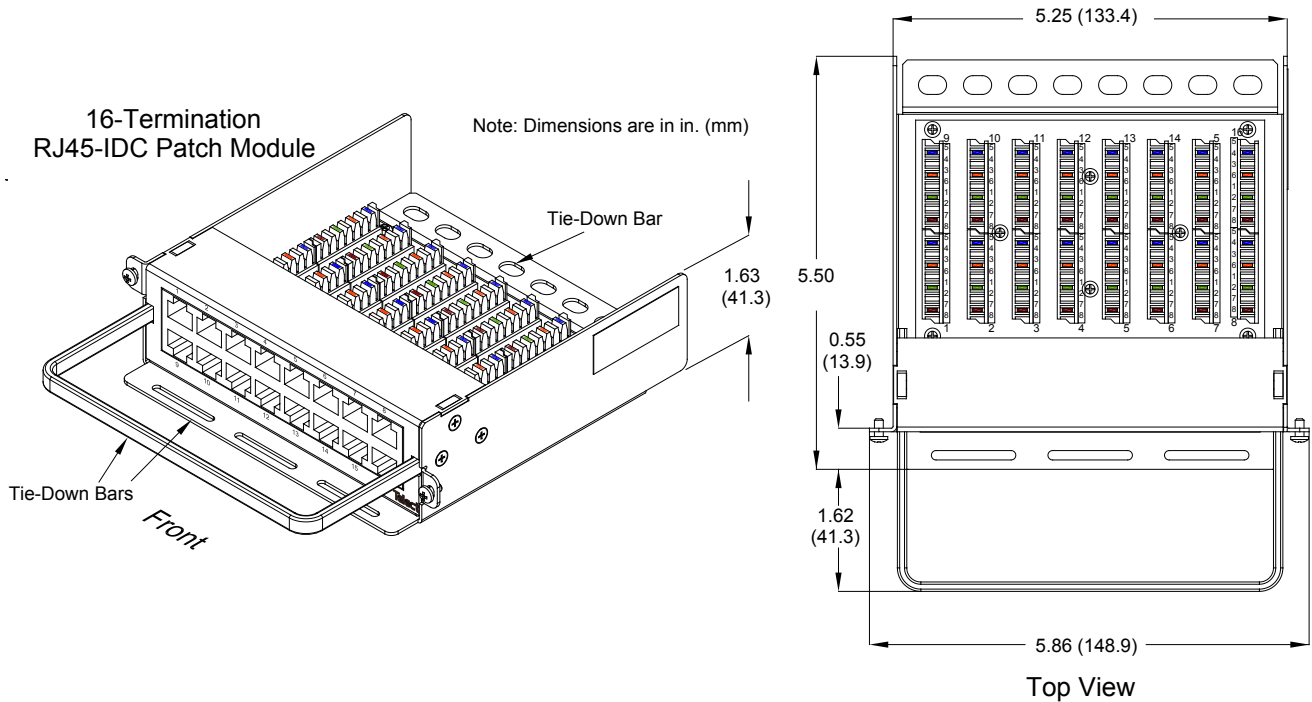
Model ELF-9716-1700 Parts & Dimensions
